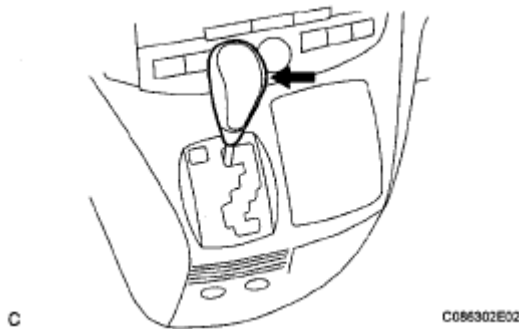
Identifying Shift Lever Knob Sub-Assembly
